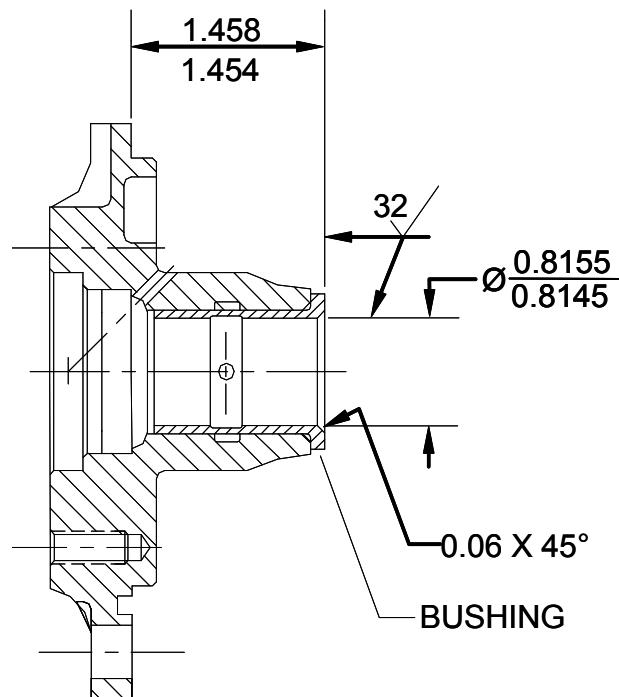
Accessory Drive Adapter Bushing Installation Detail
